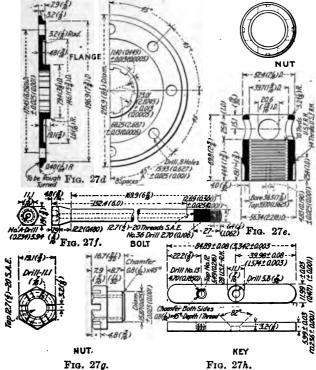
Flange. Fro. 27e.—Shaft nut. Fig. 27f.—Bolt. Fig. 27g.—Nut. Fig. 27h.—Key.
